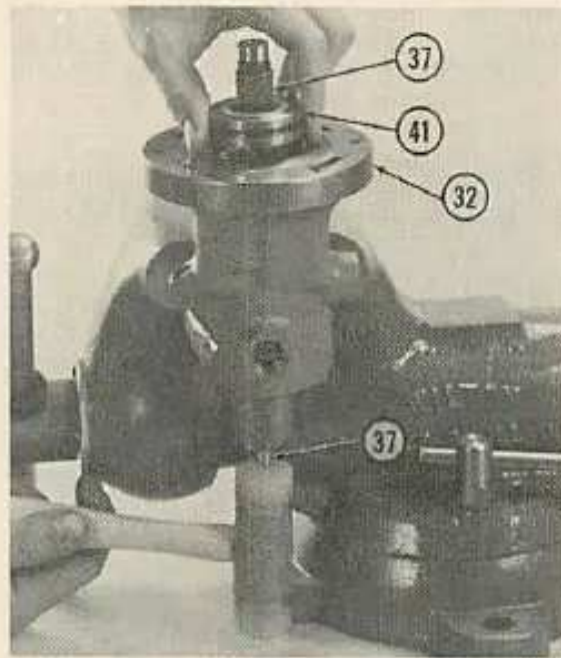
Tap on end of stub shaft (37) with soft faced mallet to bump bearing support (41) out of housing.
